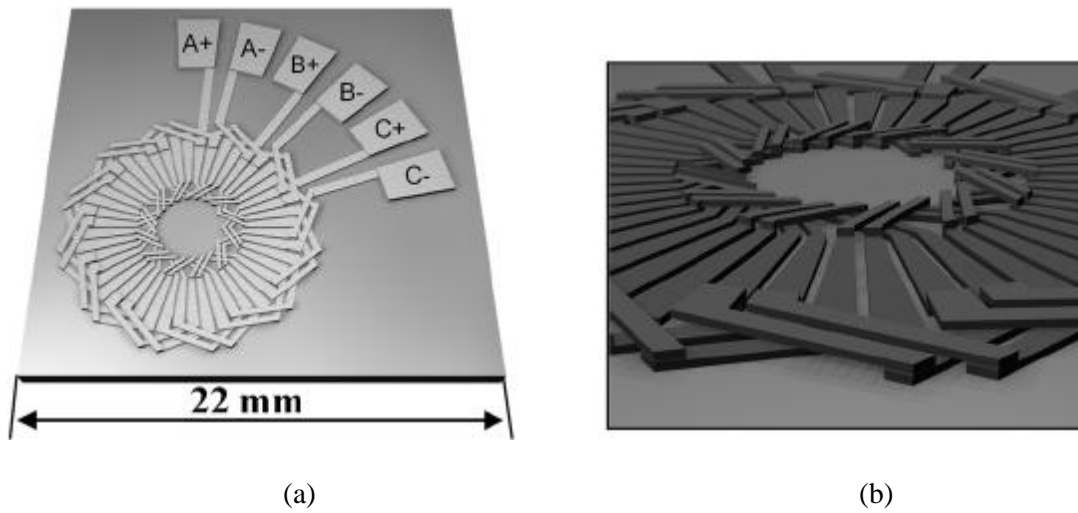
The (a) top, and (b) side views of the stator winding pattern in [77-81].
